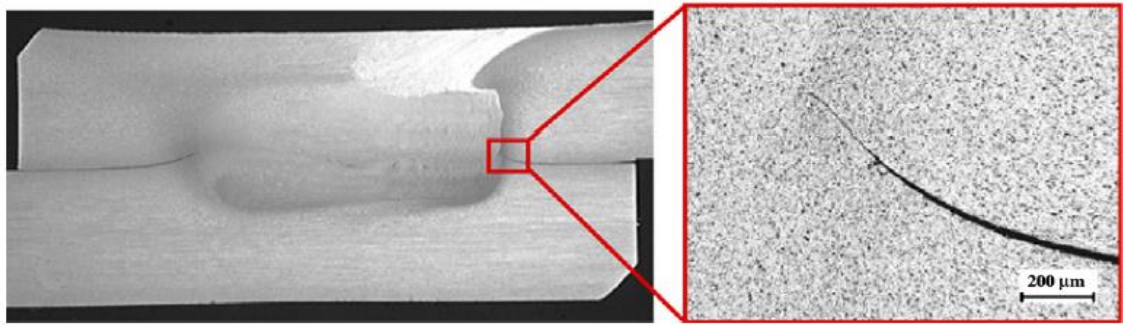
Example of overlap weld section and material hooking defect [71].
